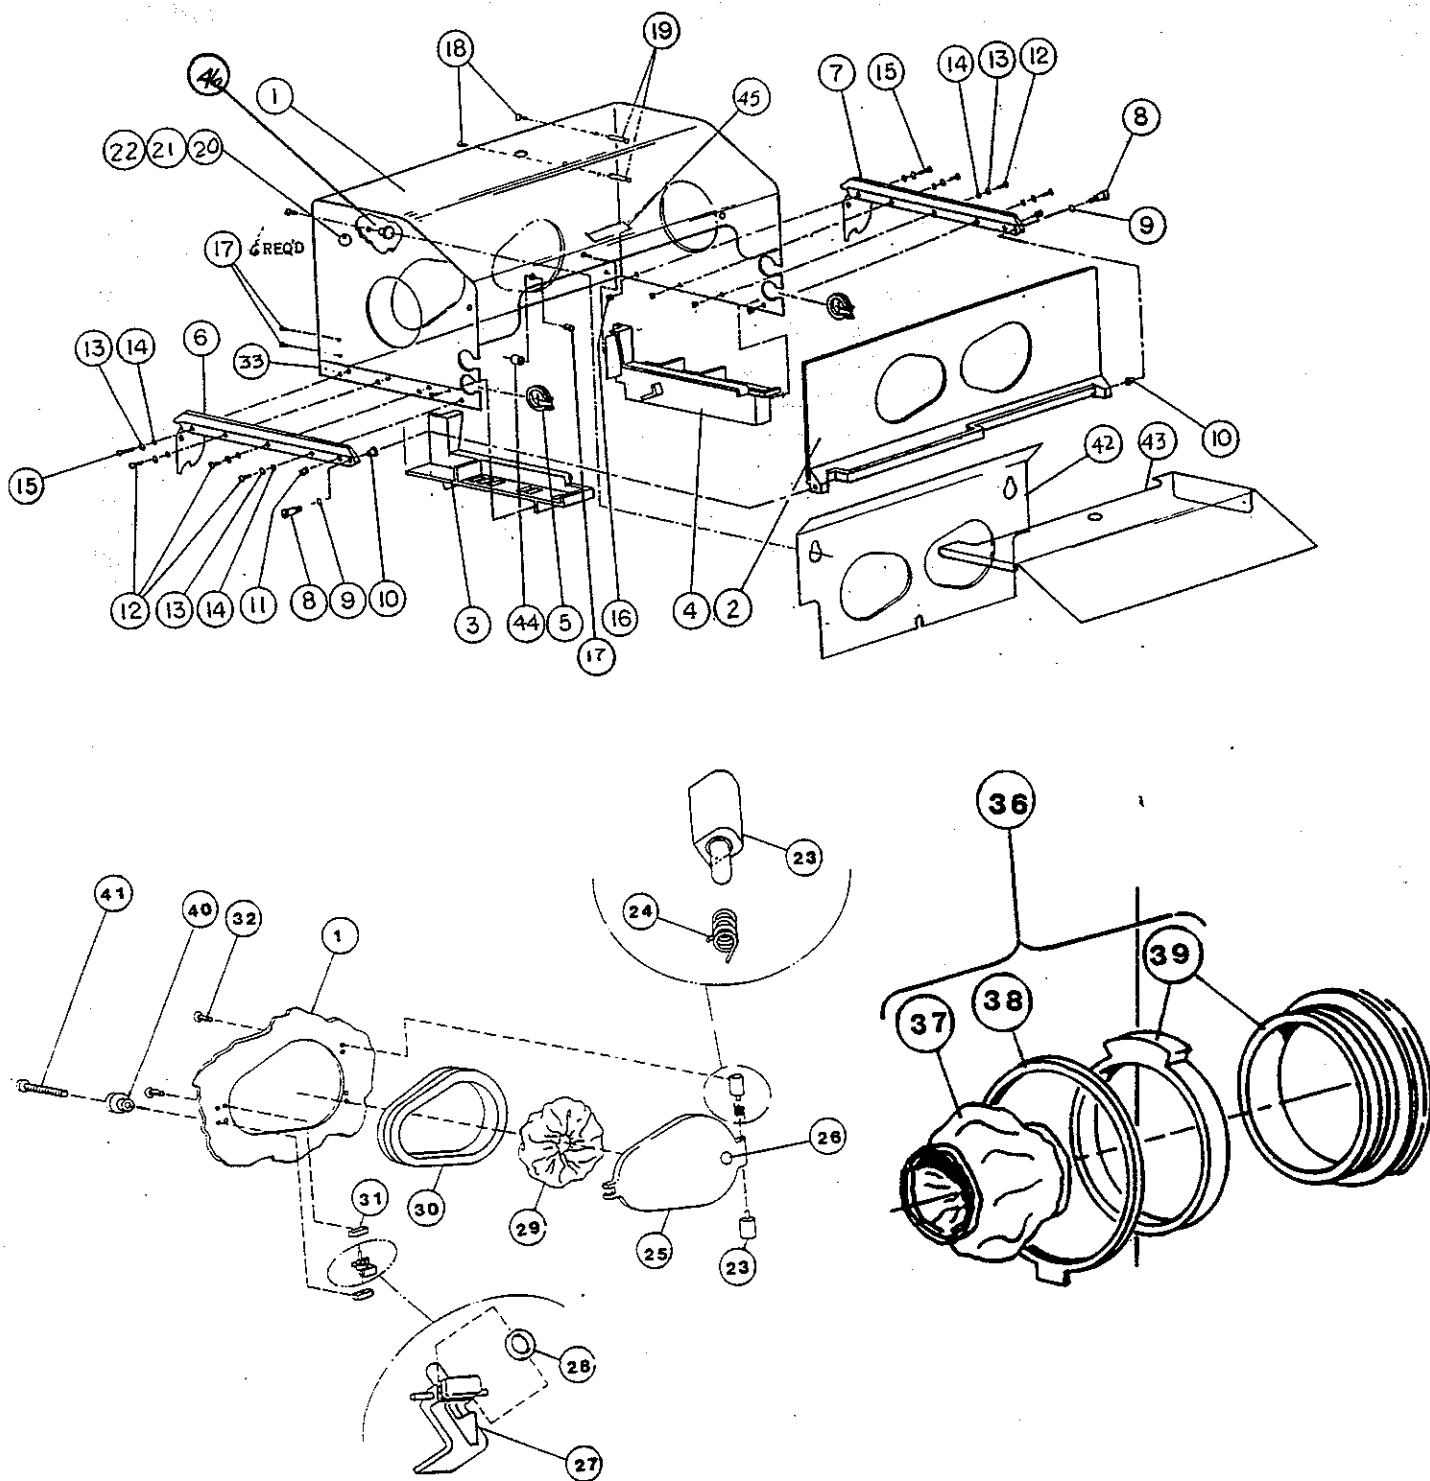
PARTS LOCATION DIAGRAM, HOOD ASSEMBLY, C500/C550 QT®
